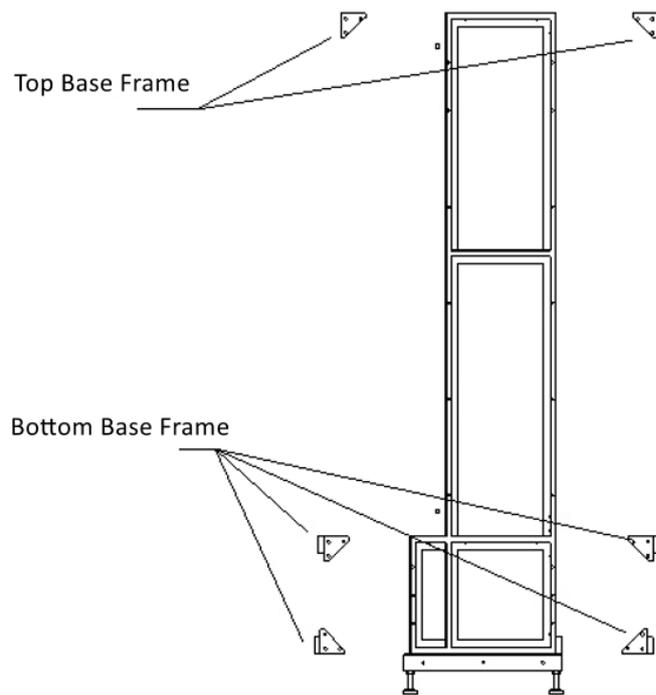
Side View of Base Frames Installation (Top and Bottom)
